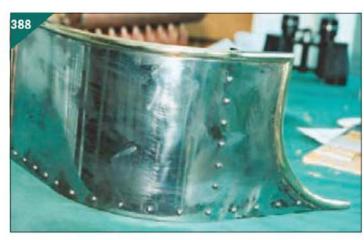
Cab assembly - side view. Fig 130. Driver's seat side panels.
